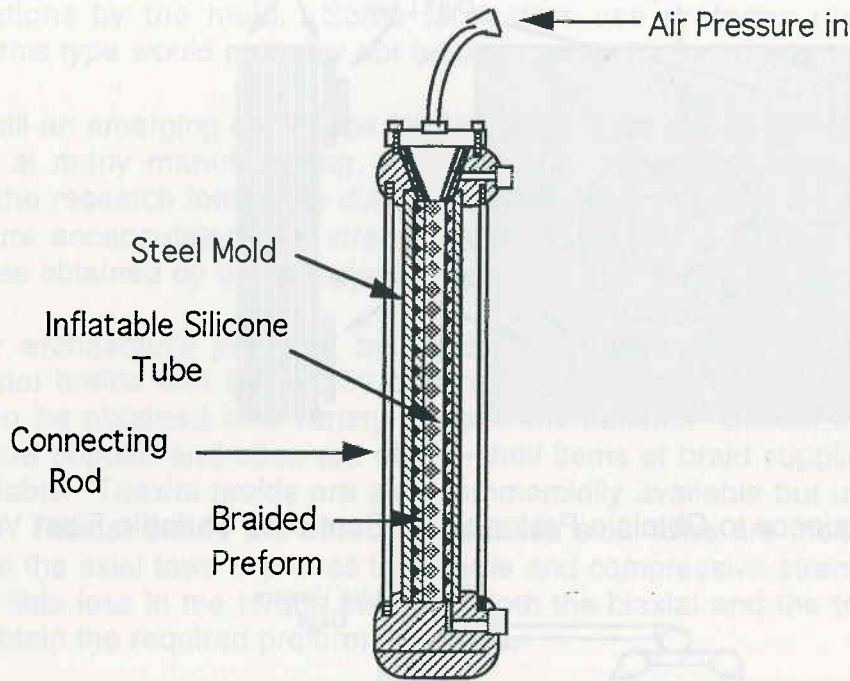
, Sketch of Mold 1 - Silicone Bladder Type
